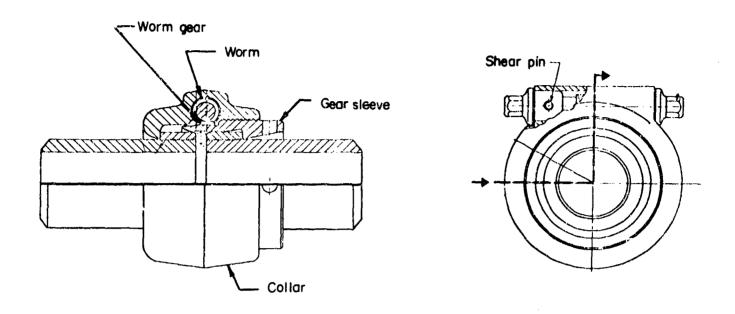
RESISTOFLEX GEAR-POWERED UNION
